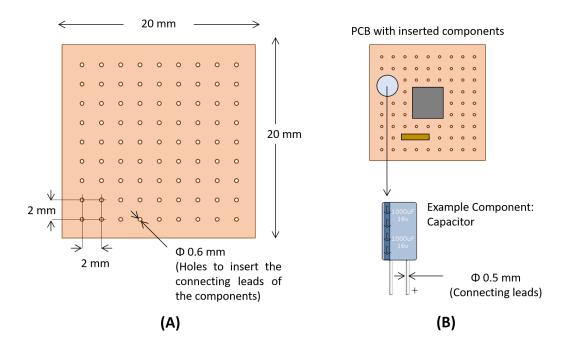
(A) Blank PCB, and (B) Assembled PCB with a typical electronic component
